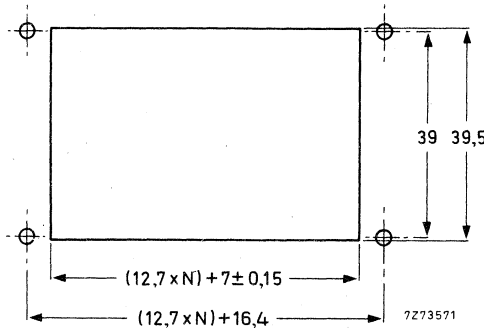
Panel cut-out for T switches and end-pieces for mounting with four M3 screws.
